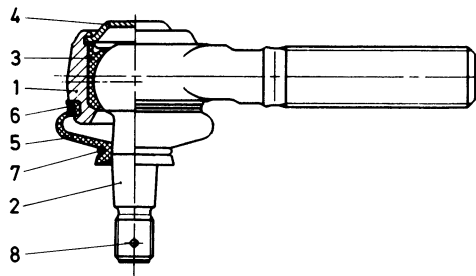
Lemförder Fahrwerktechnik pre-lubricated tie rod joint, used on passenger cars and light vans. The joint housing 1 has a fine thread on the shaft (M14 \times 1.5 to M22 \times 1.5) and is made of annealed steel C35V; surface-hardenable steel 41Cr4V is used for the ball pivot 2.
